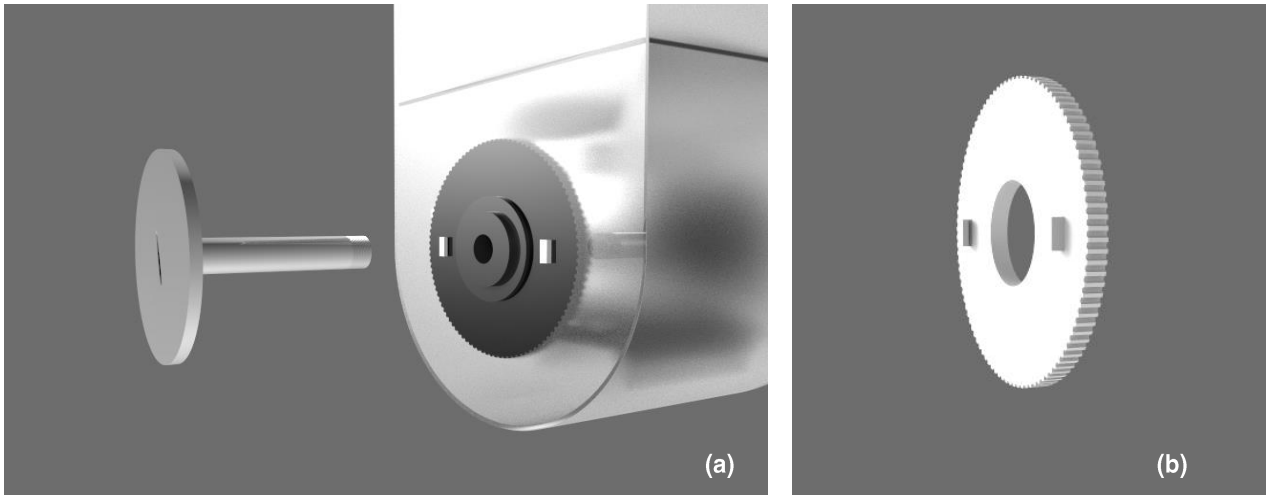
Details of the system components: (a) screw and gear fitting; (b) gear.
